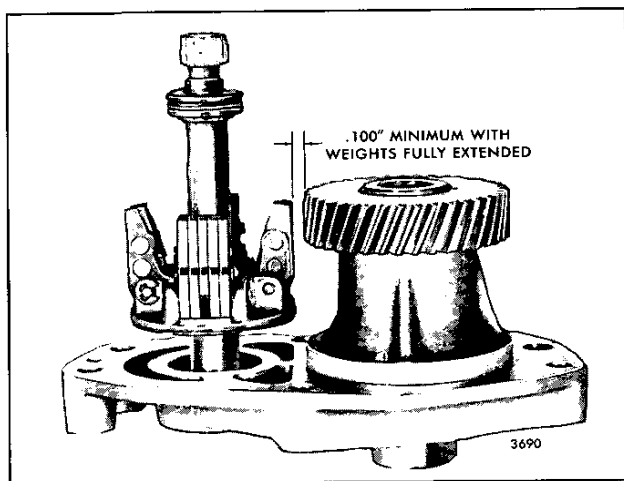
Minimum Clearance Between Blower Drive Gear and Governor Weights
